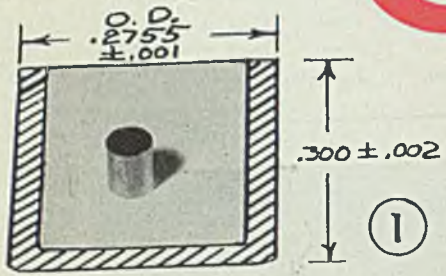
Cup-shaped nickel filter used in V-T fuse
